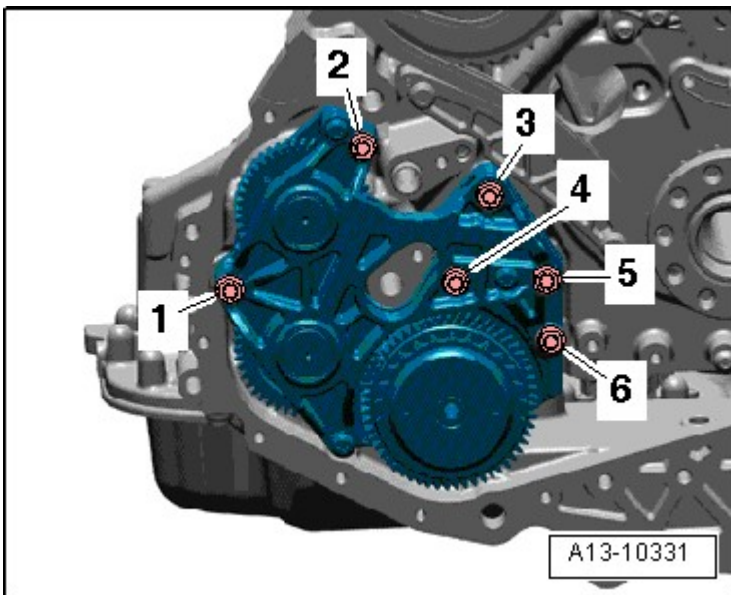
Identifying Spur Gear Unit Tightening Sequence
